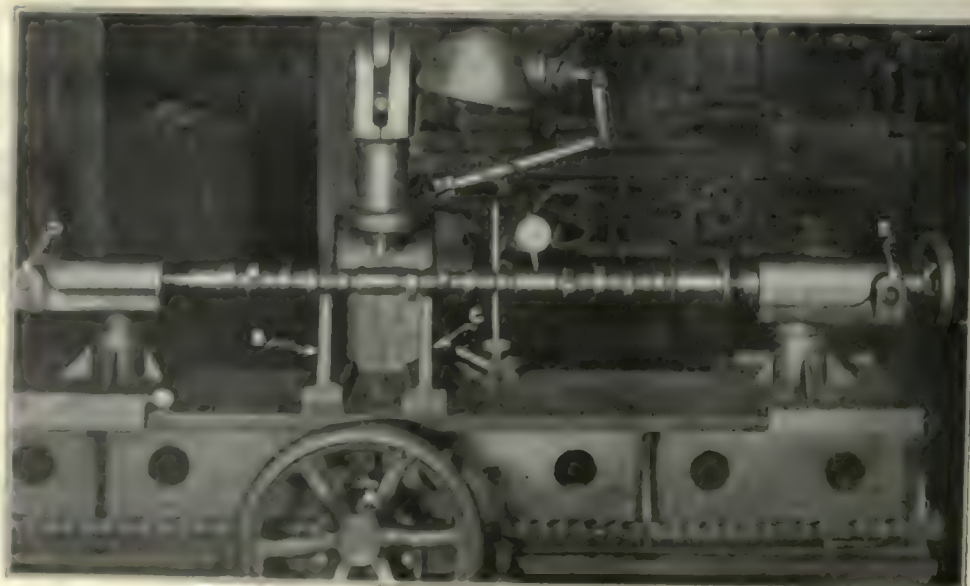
MACHINE FOR STRAIGHTENING CAMSHAFTS
